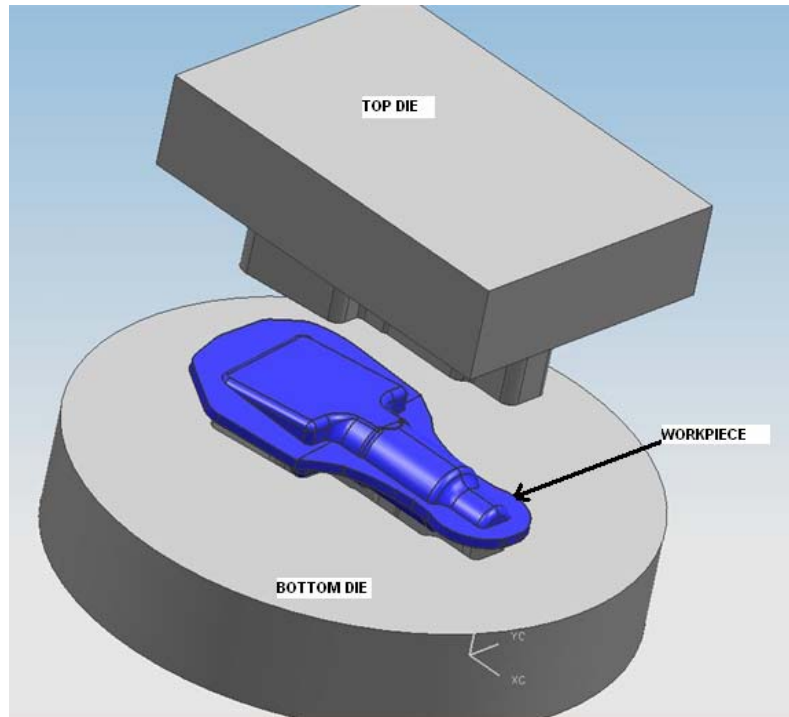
Dies and Workpiece Position of Trimming Operation
